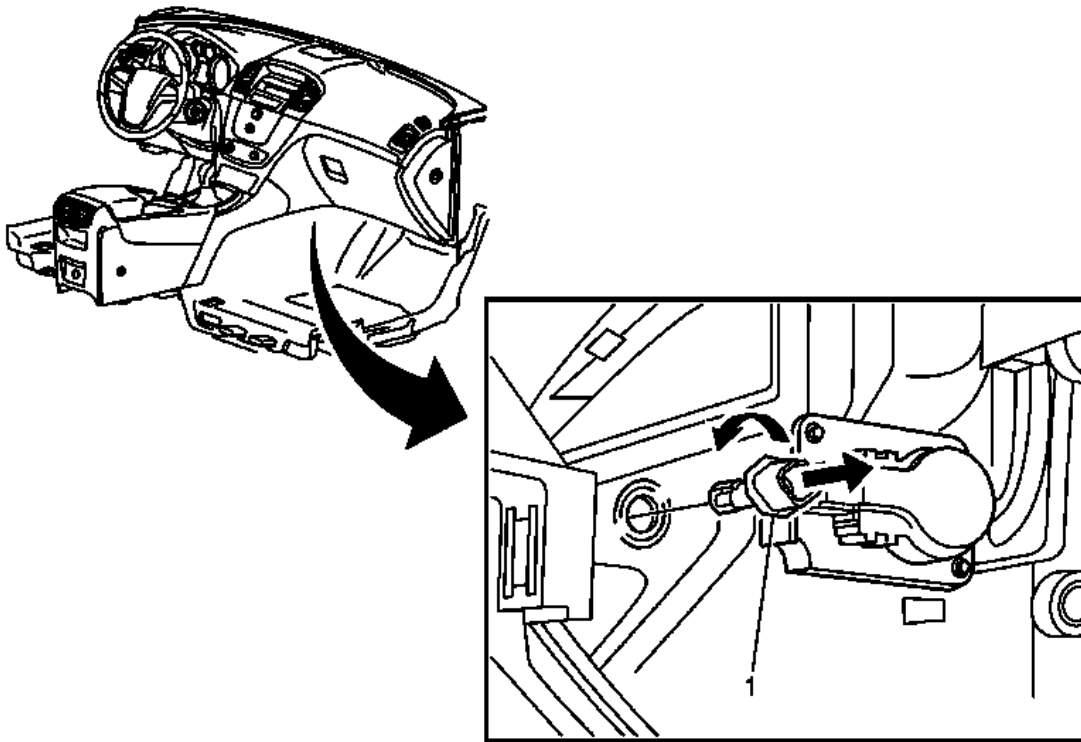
Duct Air Temperature Sensor - Lower Right Side (Left Hand Drive CJ2)
